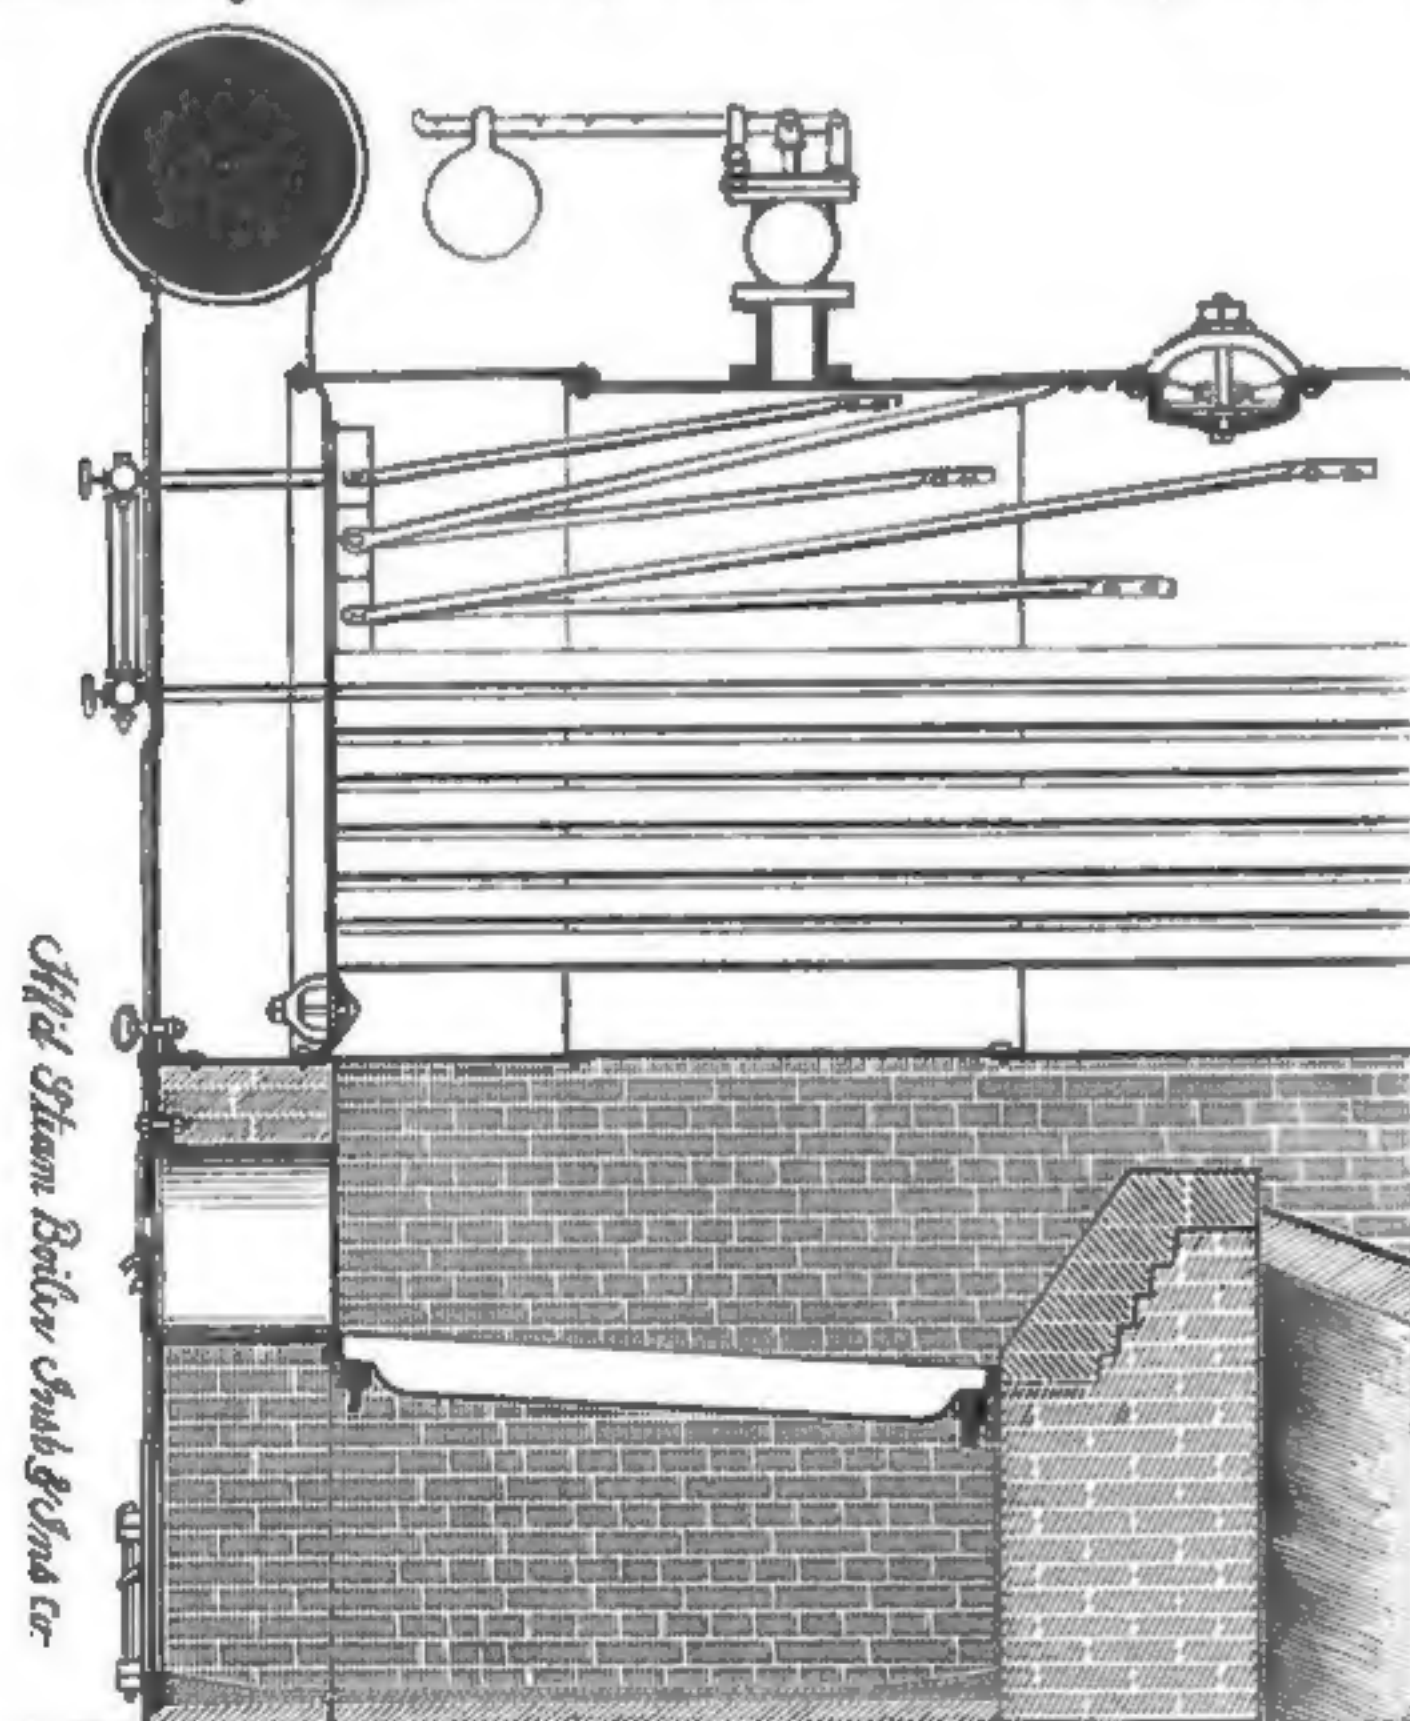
SECTIONAL VIEW OF FLUSH FRONT.
